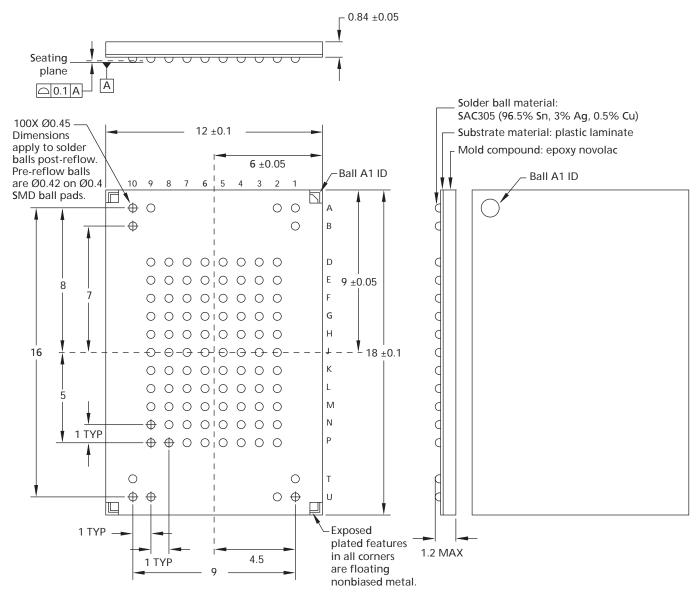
100-Ball VBGA (Package Code H1), 12 × 18
